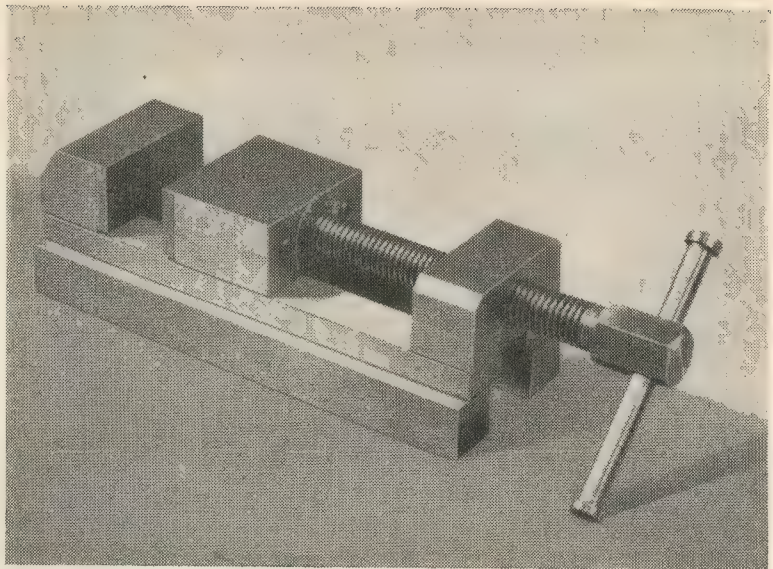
Hexagon socket cap screws are ideal for the fabrication of this kind of tool
